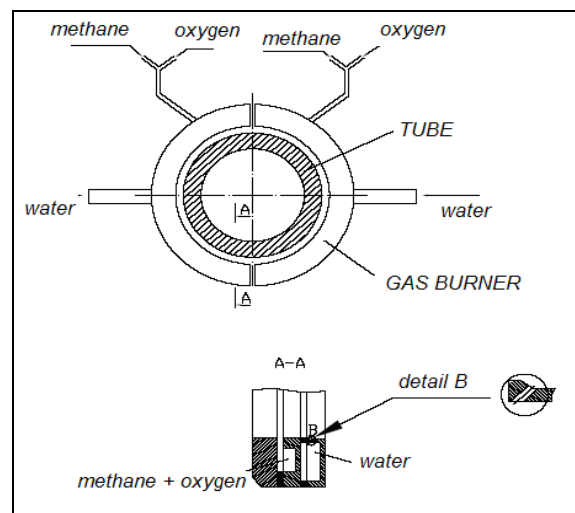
Gas burner that is used on the first machine for incremental hot bending, Czech [5].
